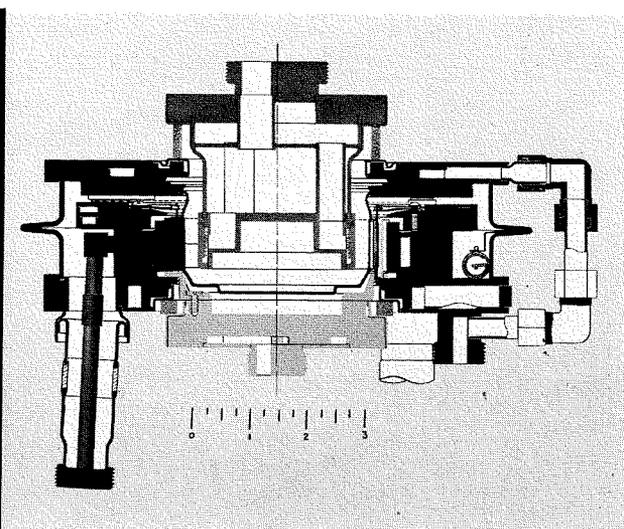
Enlarged drawing of two unit tetrodes in RCA-6448.
